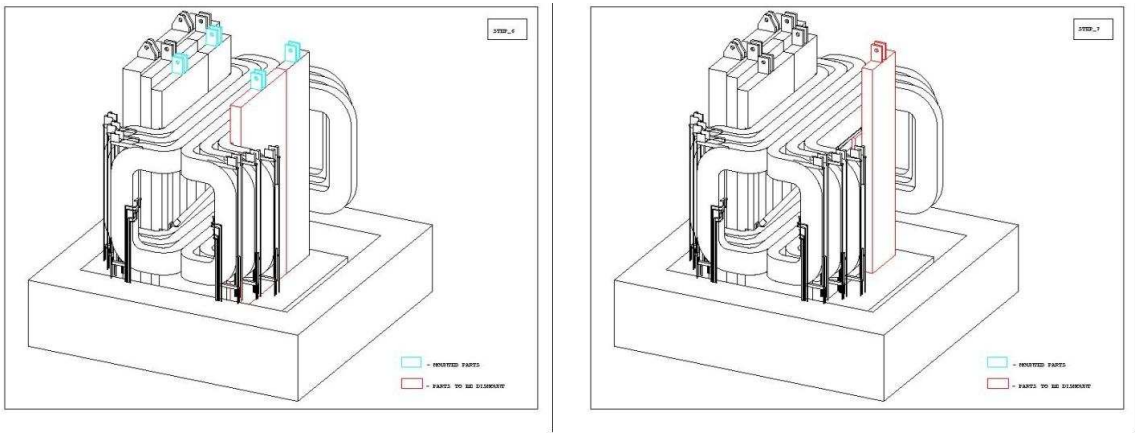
SM3 Analysis Magnet disassembly steps 7 (left) and 8 (right)
